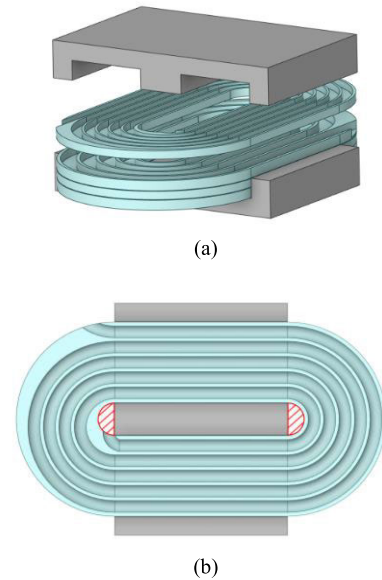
(a) Transformer with proposed stacked bobbin. (b) Top view of the stacked bobbin.
